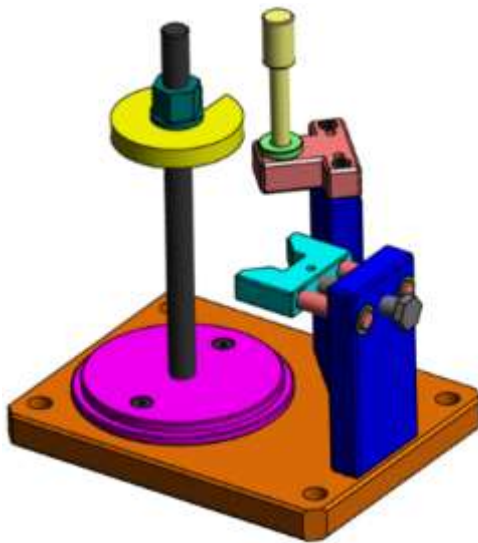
3<sup>rd</sup> Fixturing layout
